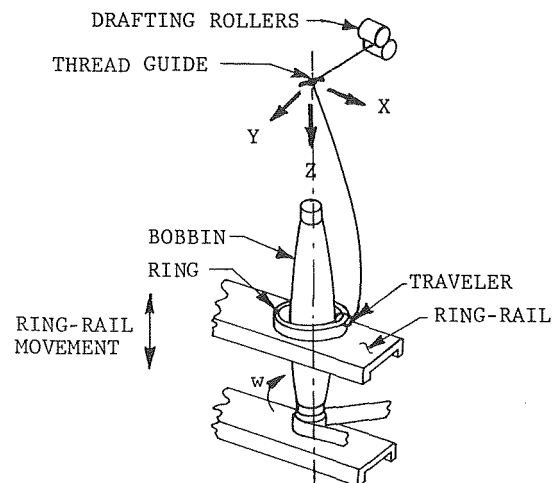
Schematic Drawing of Ring-Spinning Machine
